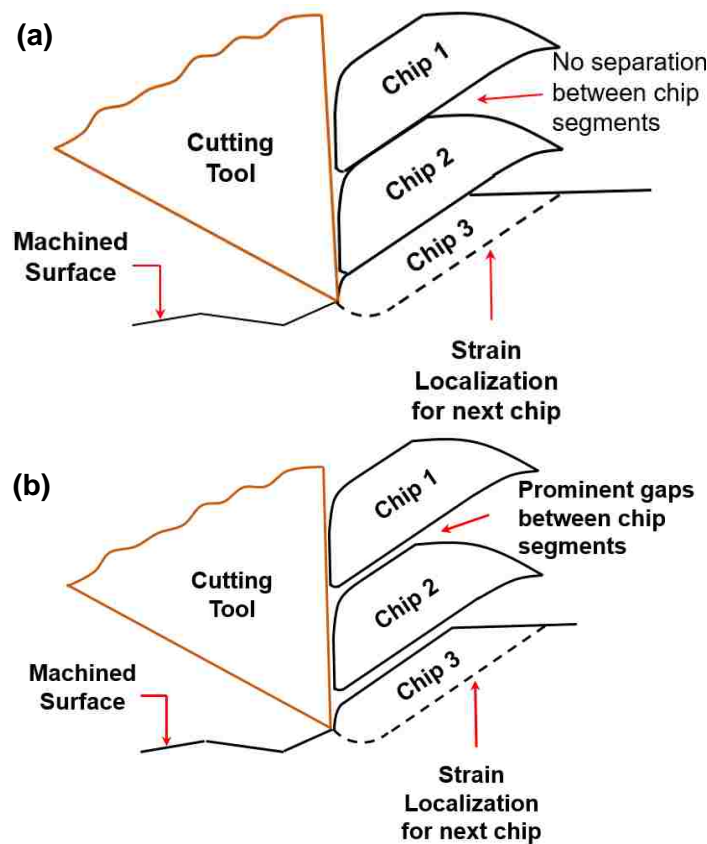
Serrated chip formation under (a) dry machining condition showing no separations between chip segments, and (b) cryogenic machining condition showing prominent gaps between successive chip segments
